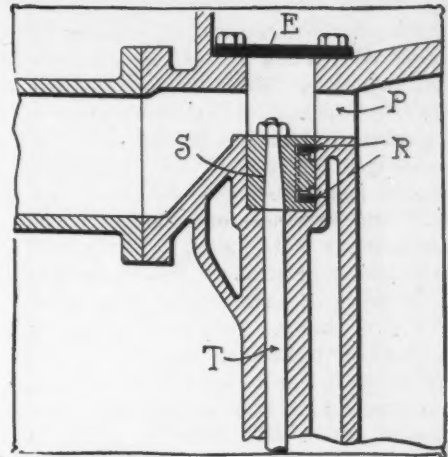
SLIDE-VALVE MOTOR BROUGHT OUT BY MERCER, OF ENGLAND
